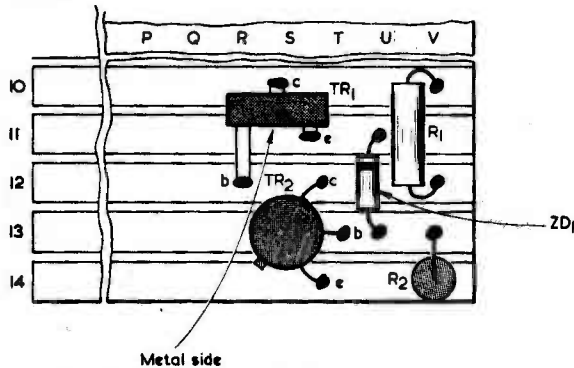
The voltage stabilizer components can be assembled on the Blob Board in the manner shown here.
